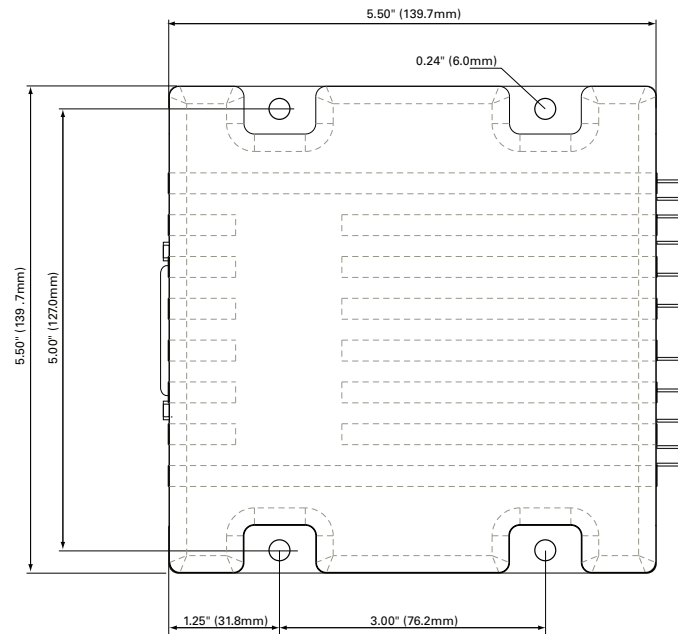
FBLG2360Txx top view and dimensionsMechanical Specifications
